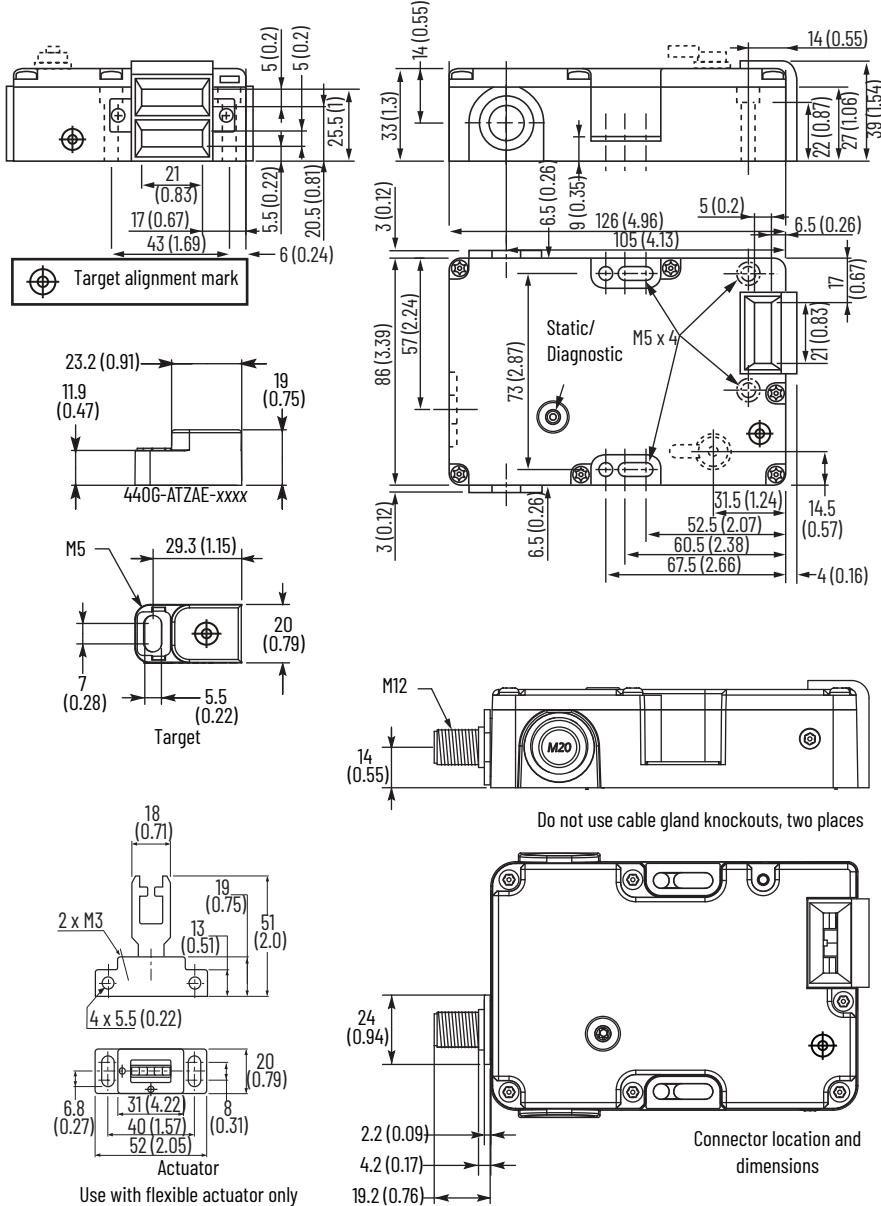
Mounting Slots for Alignment [mm (in.)]
